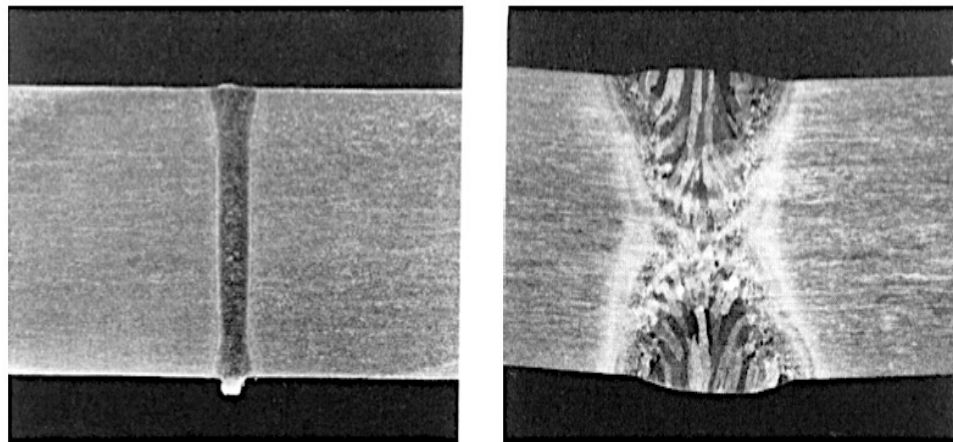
Cross sections of 12 mm Al welds performed with (a) EBW and (b) TIG [11].
